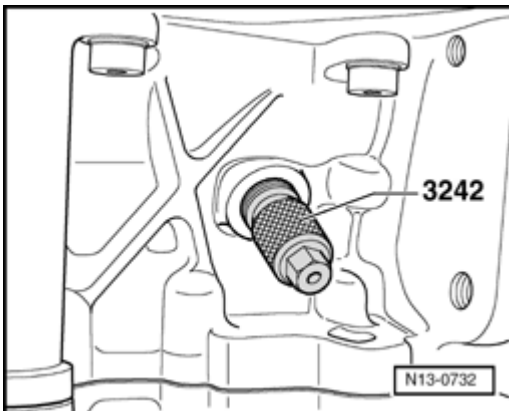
Crankshaft Holder 3242 - Securing Crankshaft From Turning
